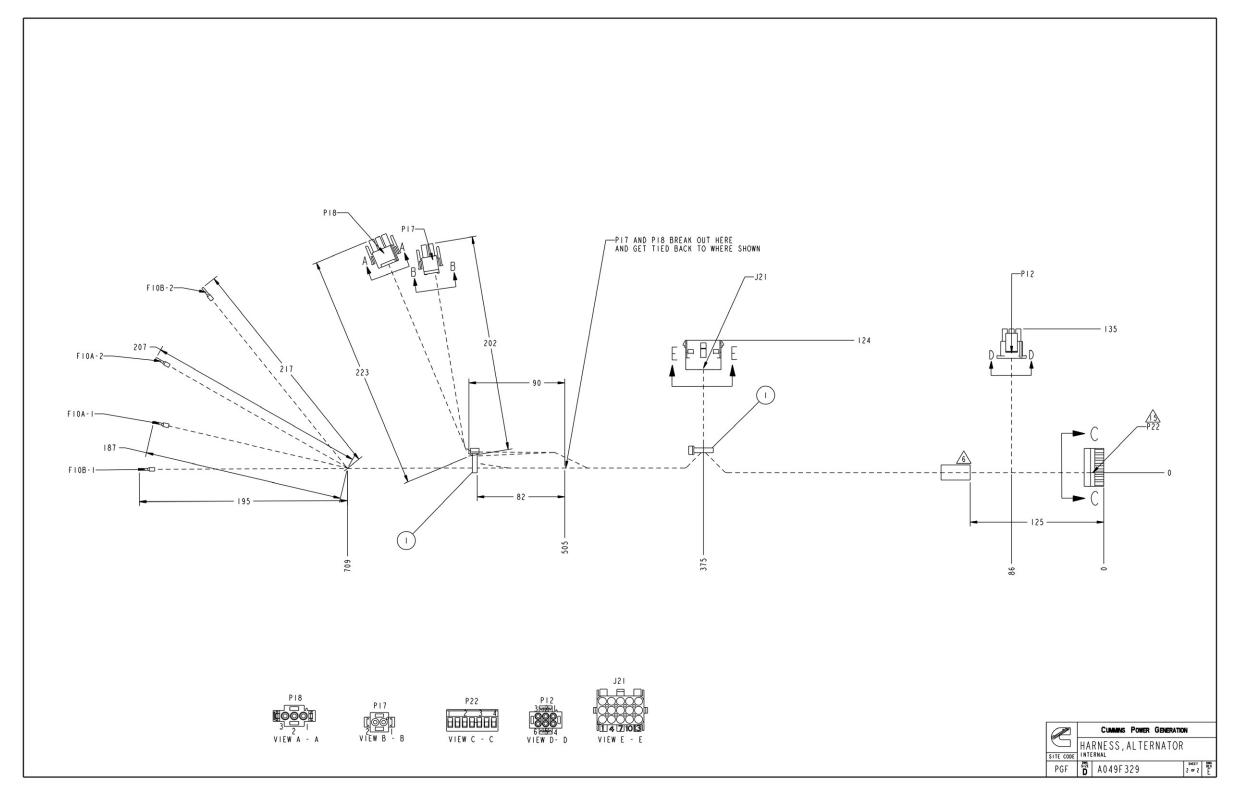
A049F329 ALTERNATOR HARNESS (SHEET 2)
